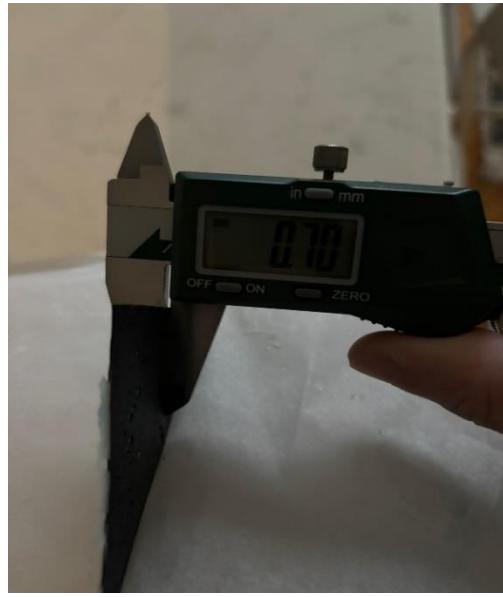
Measuring Thickness of Carbon Fiber with Caliper
